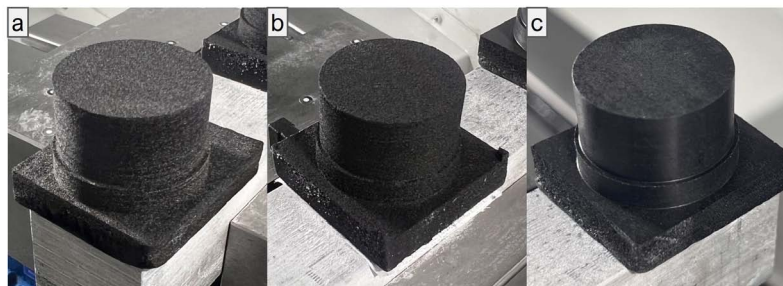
(a) Machined neat sample; (b) machined cyanoacrylate infiltrated sample; (c) machined wax infiltrated sample
